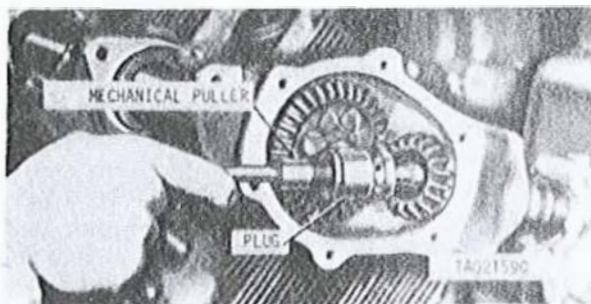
Removing or installing camshaft drive gearskuff oil transfer plug.
